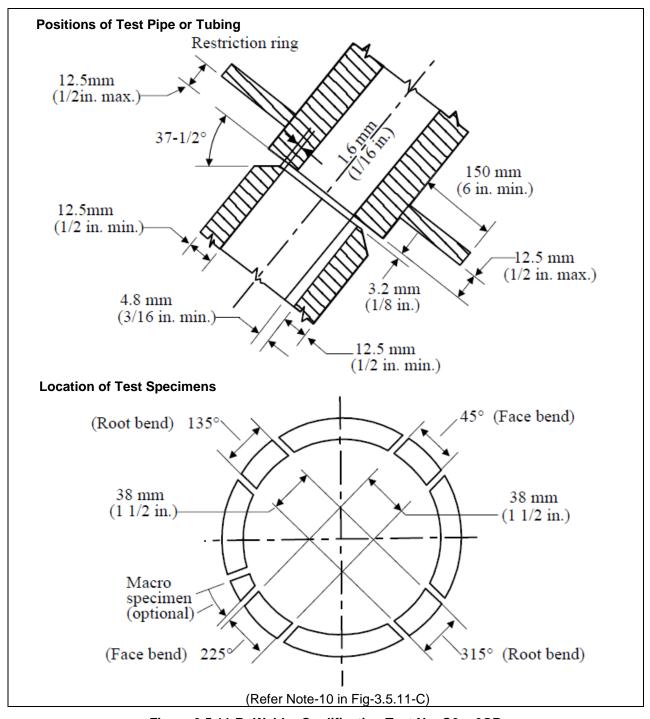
B: Welder Qualification Test No. Q3 – 6GR
